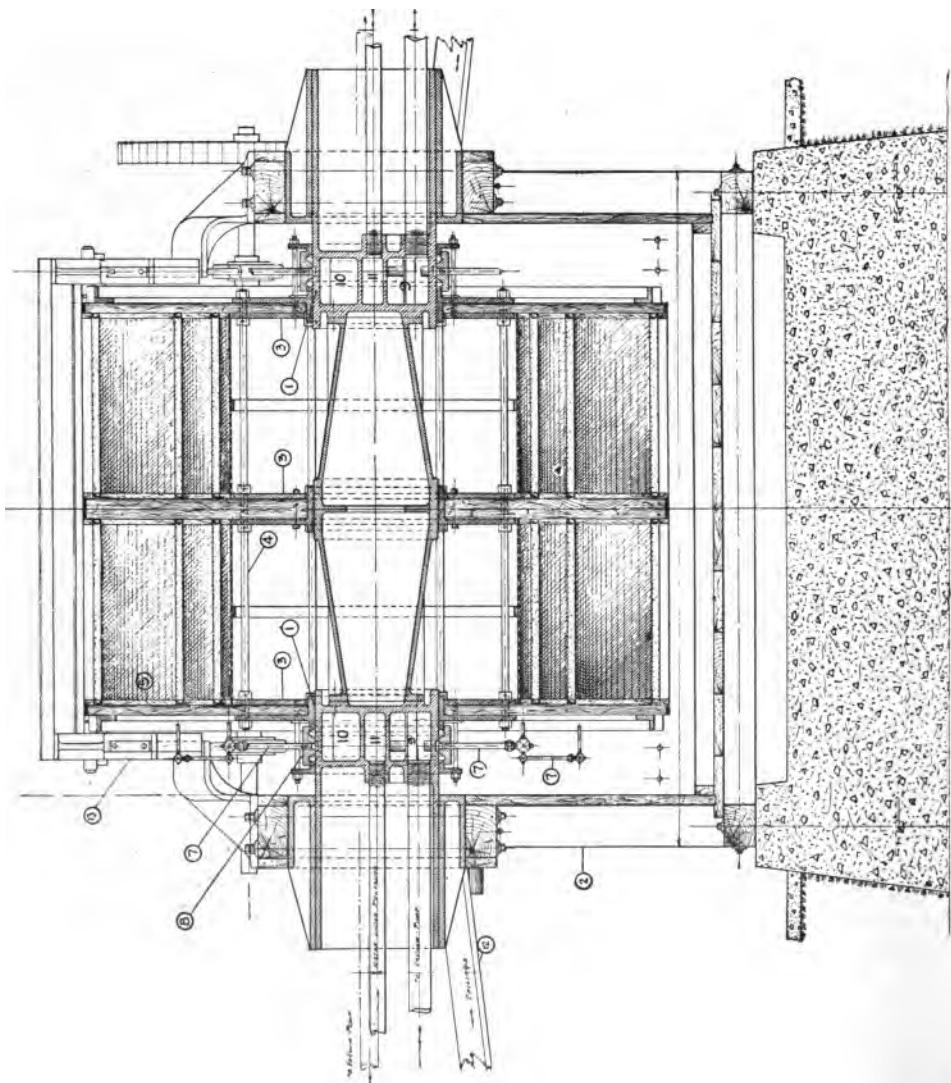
SCHORR'S CONTINUOUS SLIME-FILTER. LONGITUDINAL SECTION
